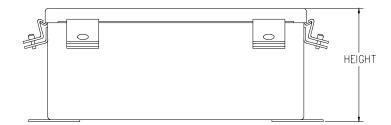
72381, 72382, 72383, BA72381, BA72382 and BA72383 Stainless Steel Housing Dimensions
